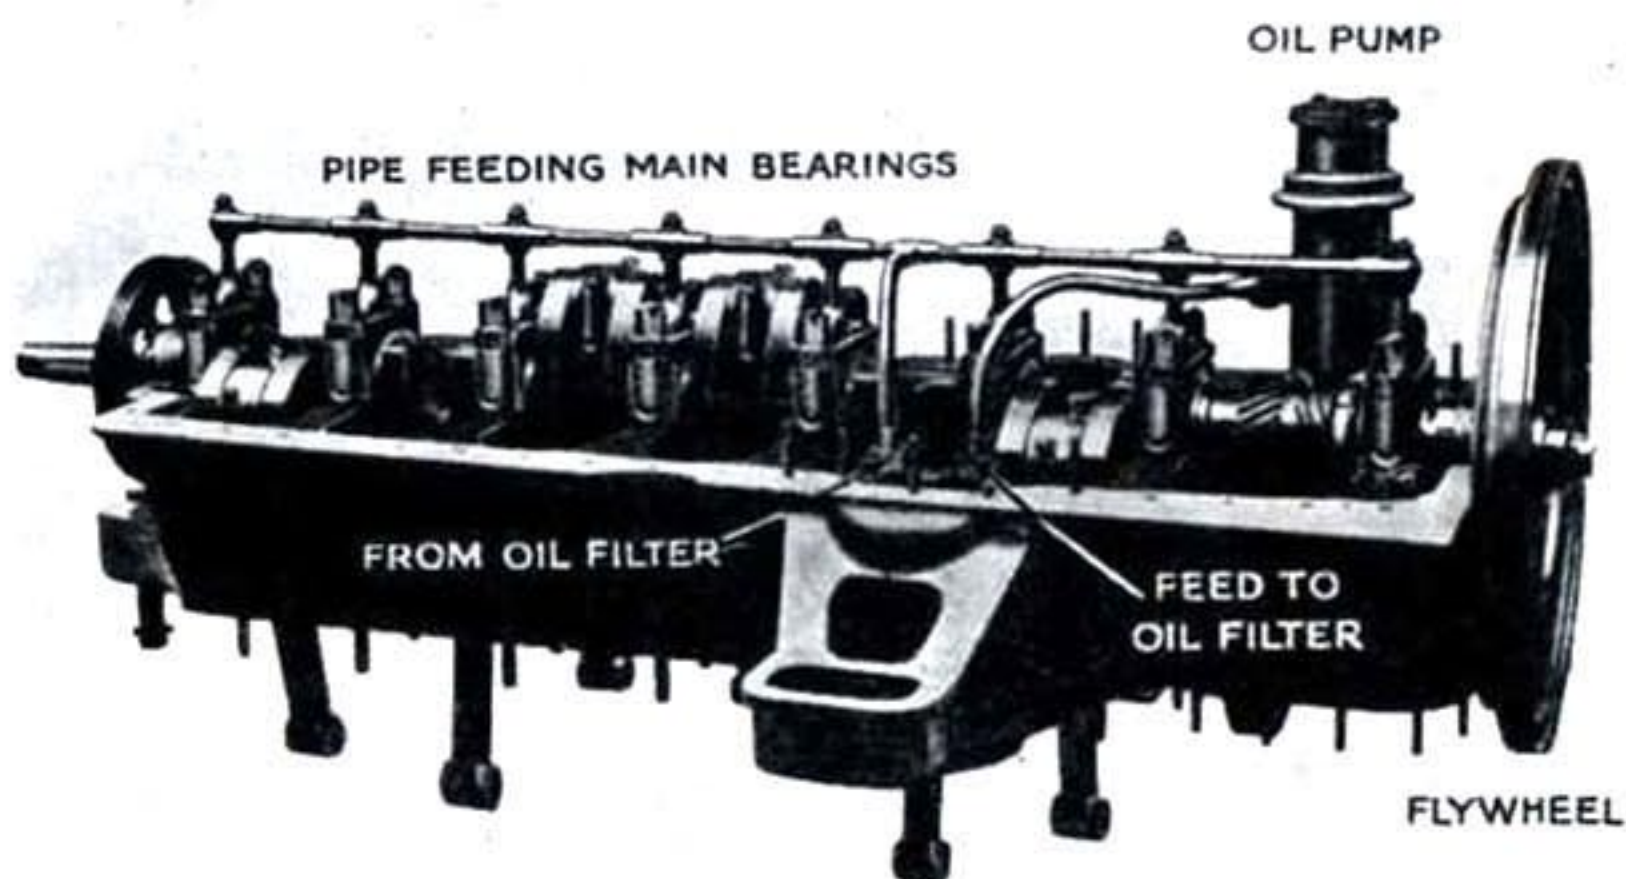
ENGINE LUBRICATION DETAILS TO BE SEEN WHEN THE SUMP IS REMOVED.
